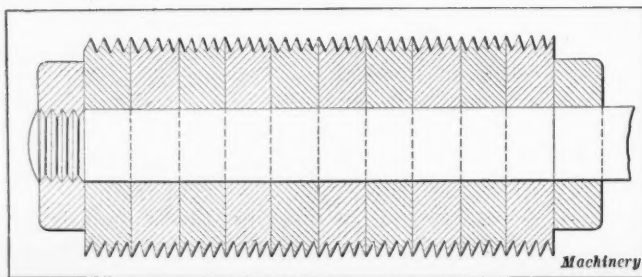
Cross-section of Milling Cutter used for cutting Teeth of Saw Blades
